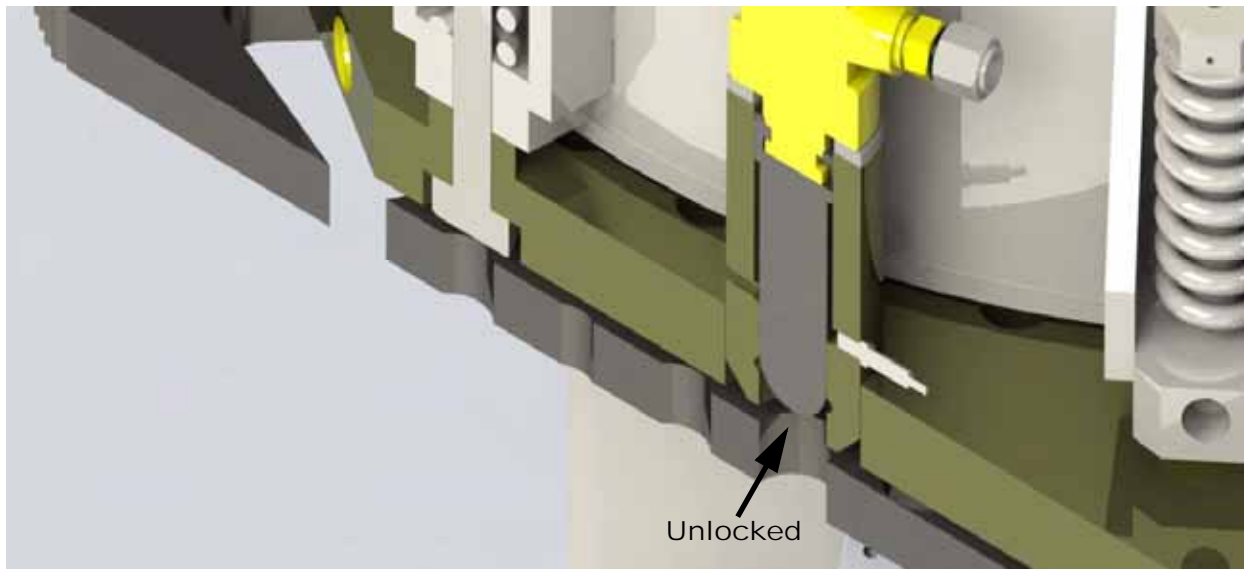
Ensure Handler Lock Pin is in Fully Locked Position.
